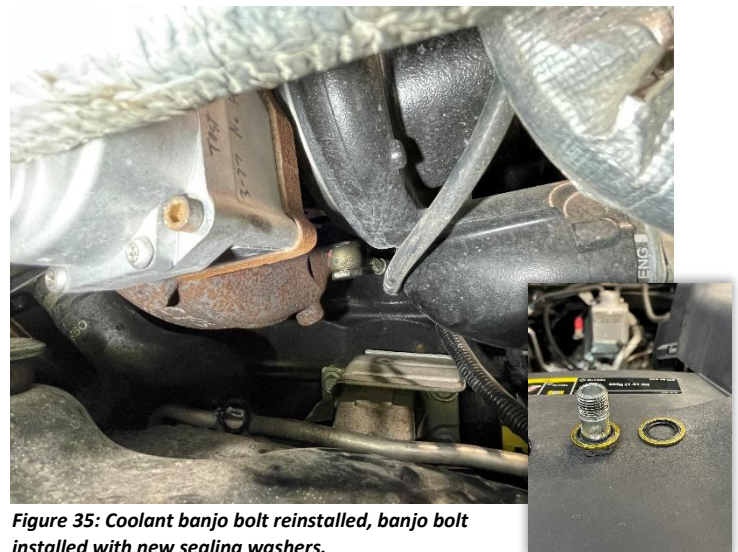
Coolant banjo bolt reinstalled, banjo bolt installed with new sealing washers.
